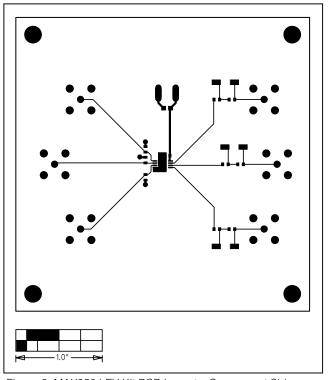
MAX9584 EV Kit PCB Layout—Component Side
